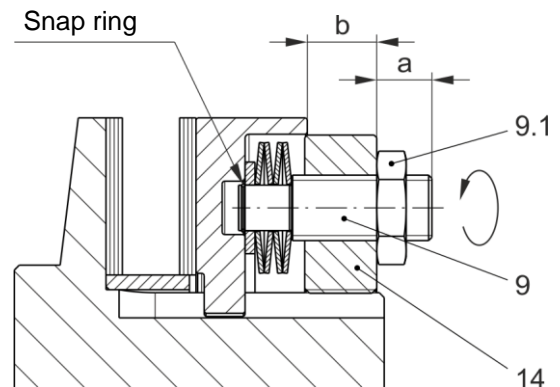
Cup spring supporting bolt (9) with counter nut (9.1)
